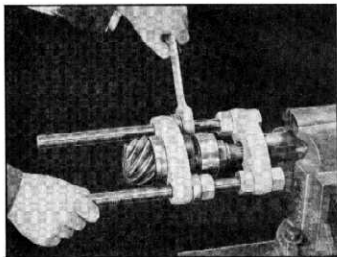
Removing Pinion from Propeller Shaft Coupling
